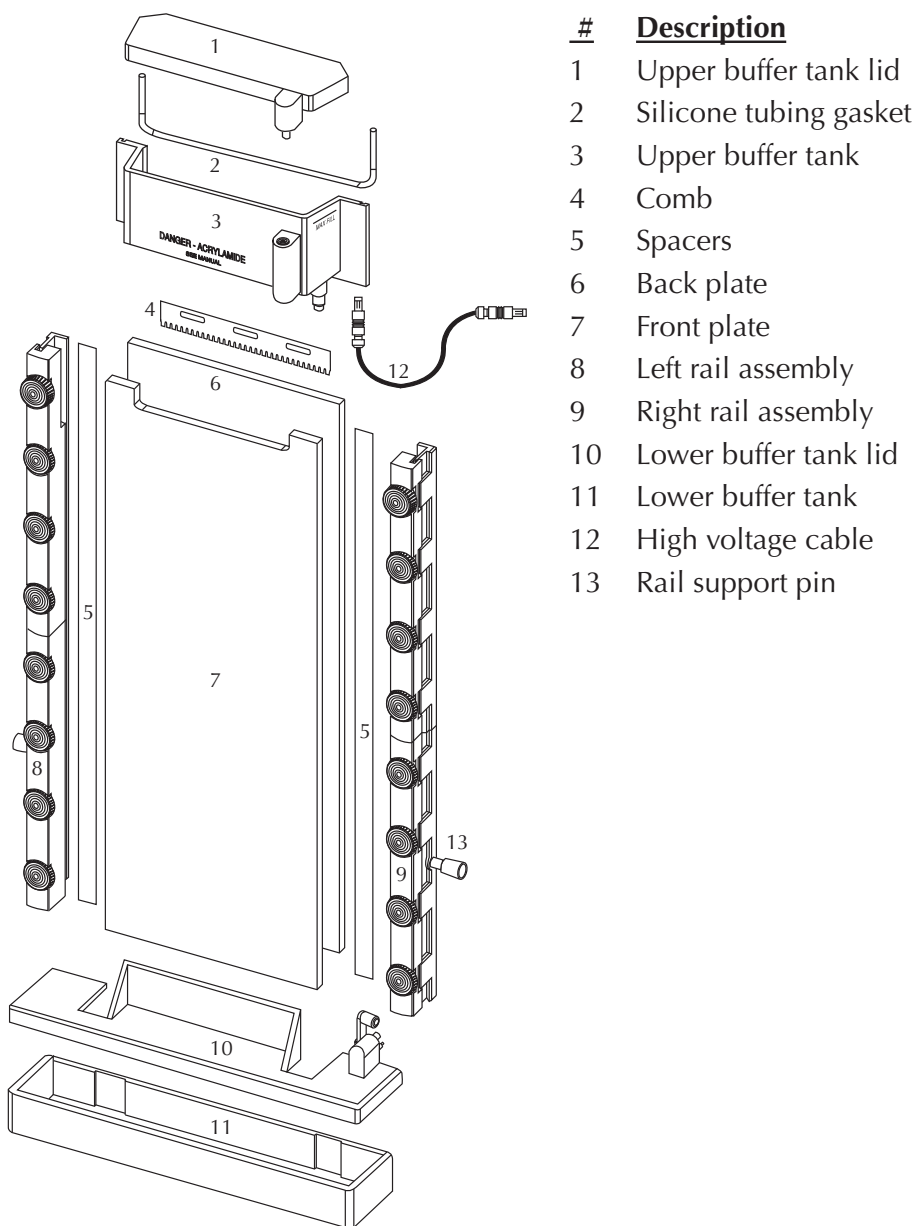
Exploded view and parts list for 66 cm gel apparatus.
